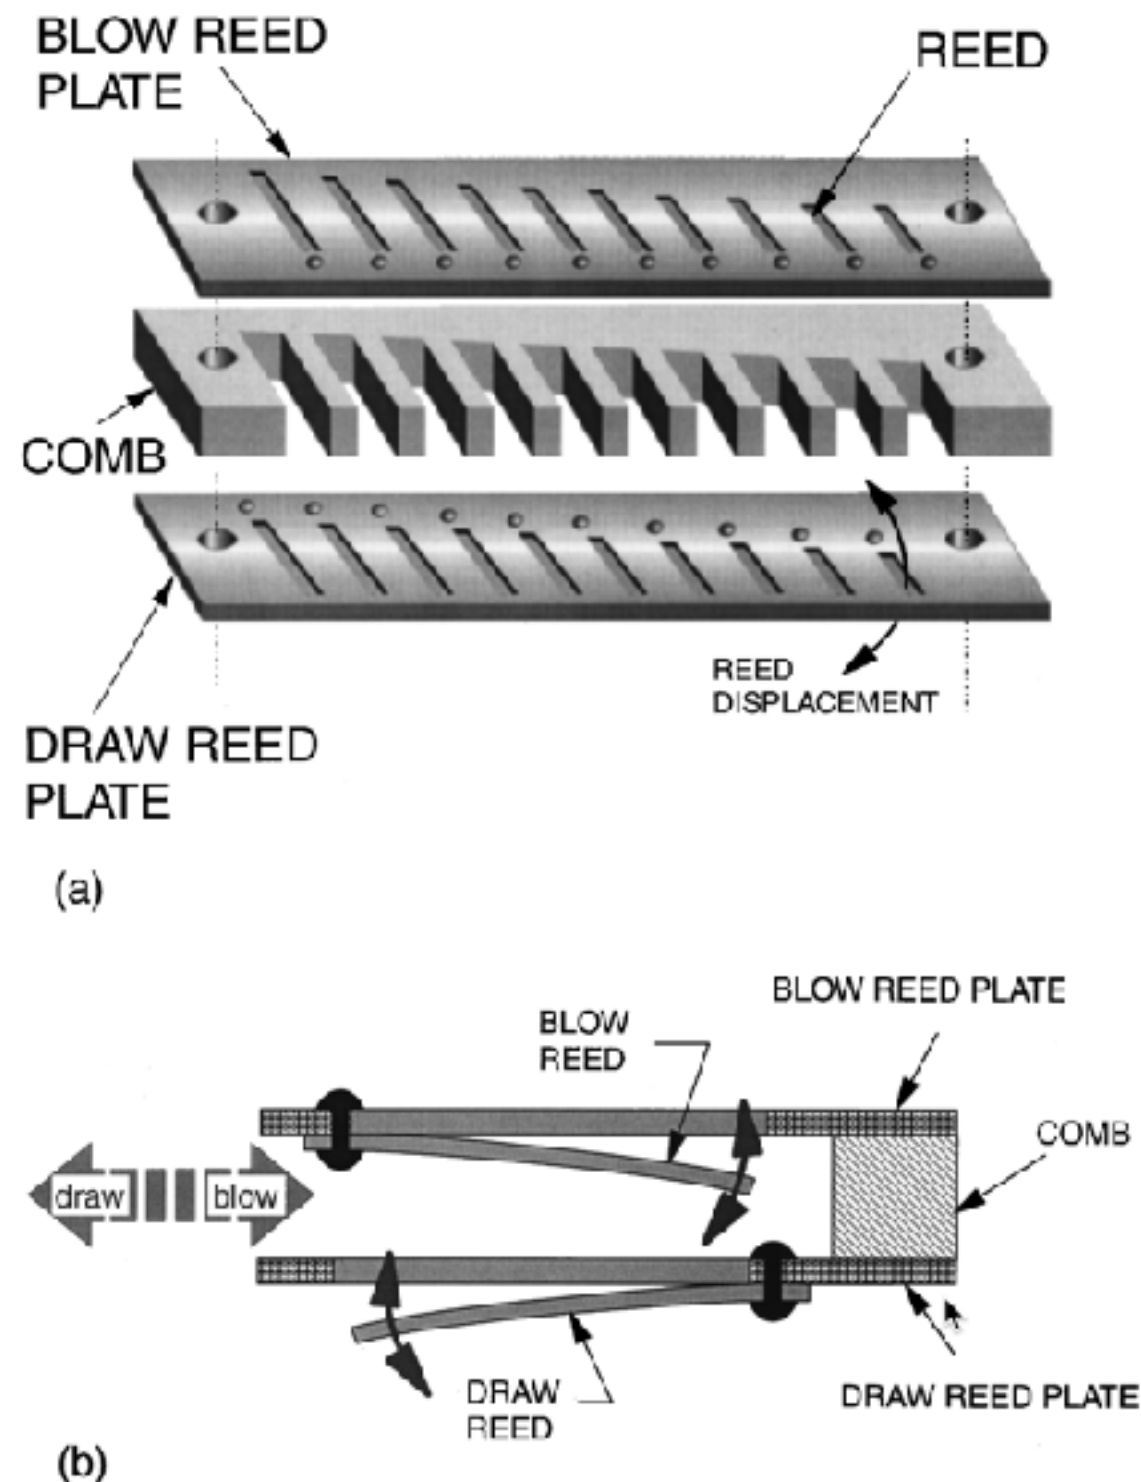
(a) Exploded view of the ten hole diatonic harmonica showing the upper, blow reed plate, the lower, draw reed plate and the separating comb. Upper and lower covers of the reed plates are not shown. Reeds are mounted on the inside surface of the blow reed plate and the outside of the draw reed plate. Thus blowing closes the blow reed into the blow reed plate and opens the draw reed out of the draw reed plate. The reverse occurs on drawing. It is the closing reed that speaks on natural playing. (b) Schematic, cross sectional view of reeds and plates of a hole of a diatonic harmonica. Reeds vibrate in slots cut out of the reed plate. Blowing into the hole closes the blow reed and opens the draw reed. Drawing closes the draw reed and opens the blow reed.
